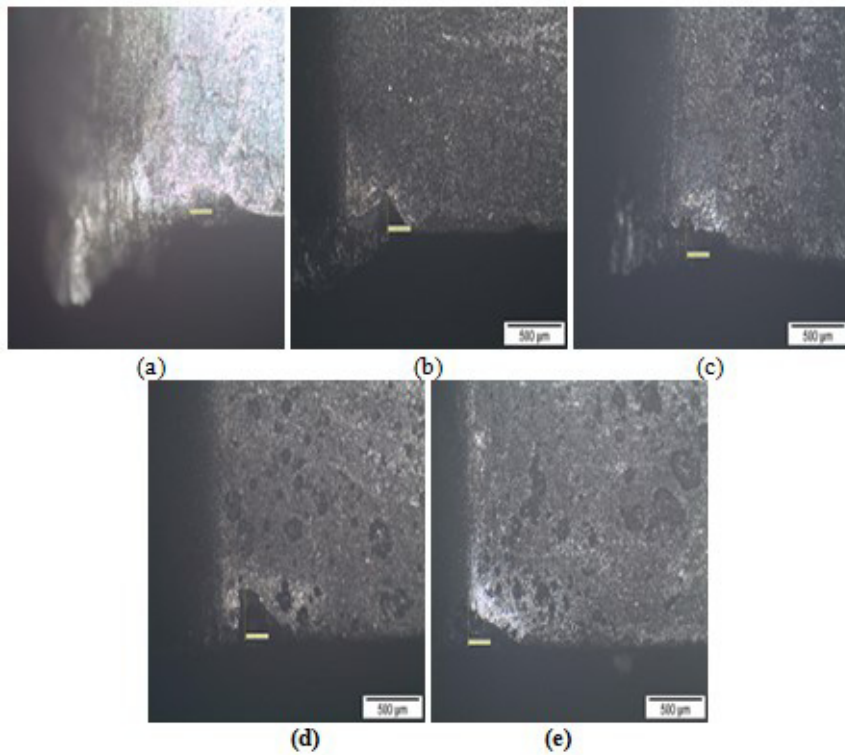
Tool wear photographs at the end of machining for (a)dry, (b) wet,(c) FNG, (d) nMoS₂ (e)NBA
